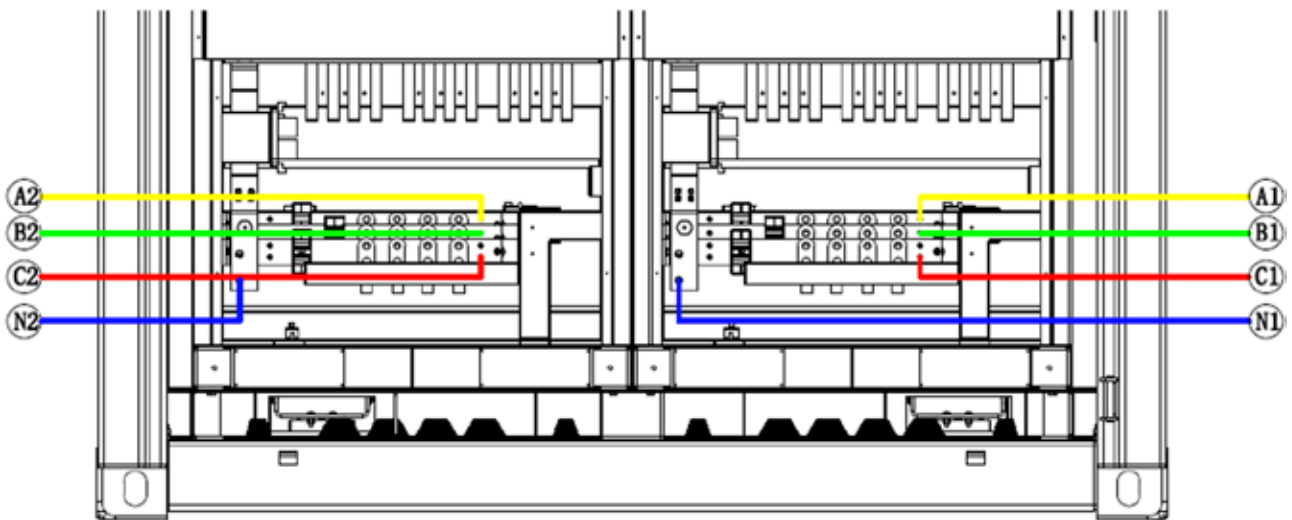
Definition of 3-core cable Definition of 1-core cable
